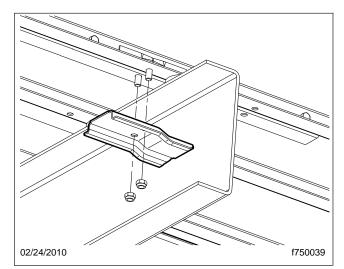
, Body Mounting Bolts and Clip (number and location vary)
